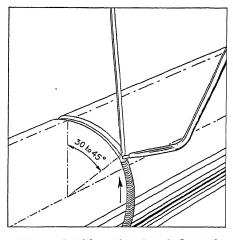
Position of rod and flame for making rolling welds with forehand technique.
